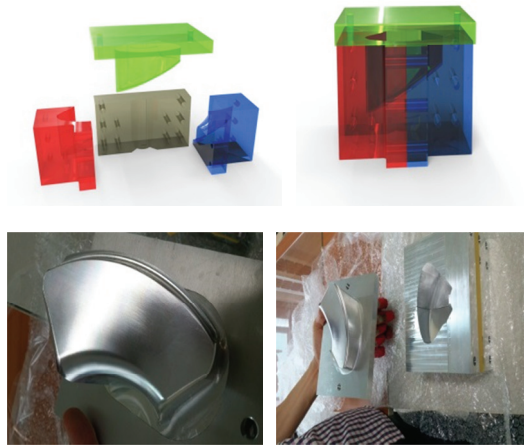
Molding jig design Rendering and fabricated aluminum.
